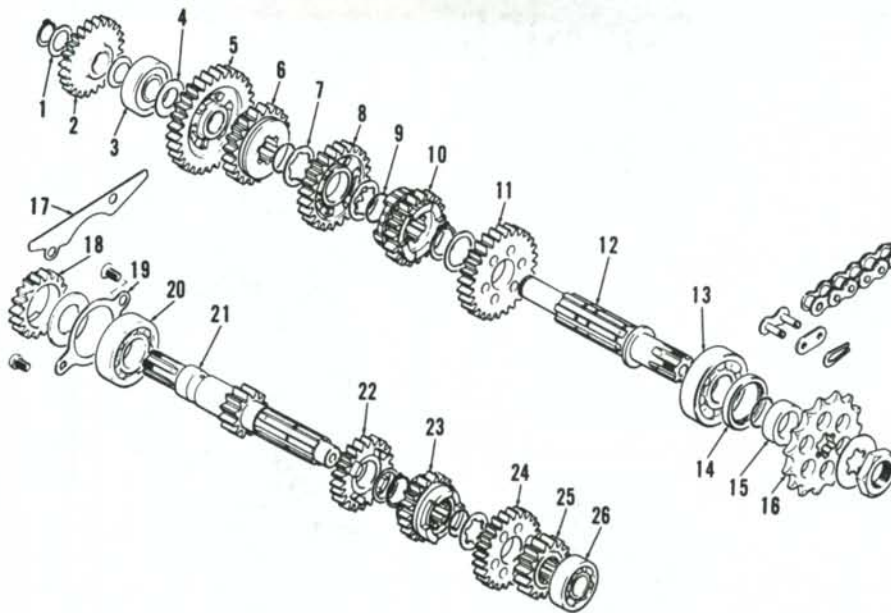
Exploded view of transmission typical of all models except TS 250 and TS 250II.
